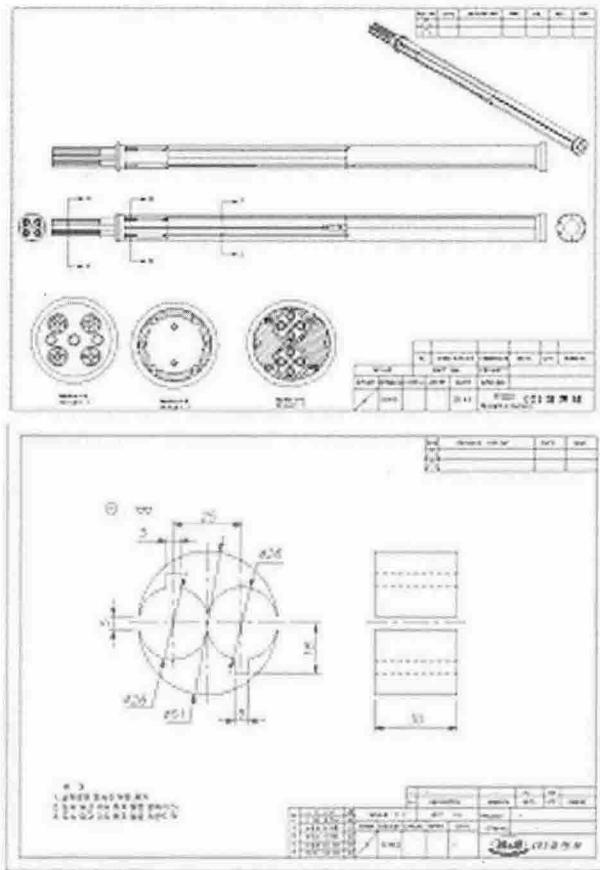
Drawings to show a shape and position of thermal insulator in the multi-channel mechanical machine
